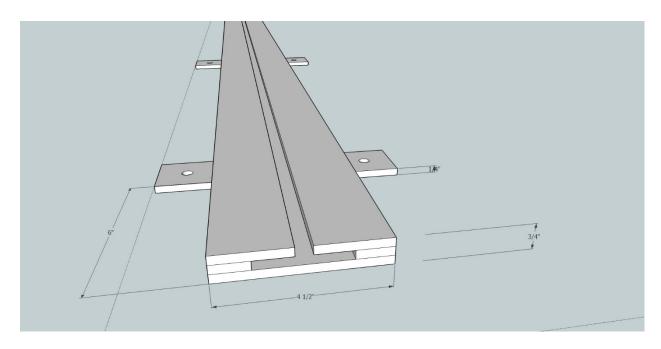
Detail of mounting channel showing slot for camera I-beam. The channel will be constructed from ¼" sheet aluminum welded into a laminate. The channel will be mounted at least one foot above the fishway floor. A stop will prevent the i-beam from extending below the channel (not shown). Mounting tabs will be a minimum 24" O.C. and rails will be anchored with ¼" SS Hilti bolts with an embedded depth of ~2" each. I-beams will be placed in area out of the direct flow as shown in Figures 1 and 2.
